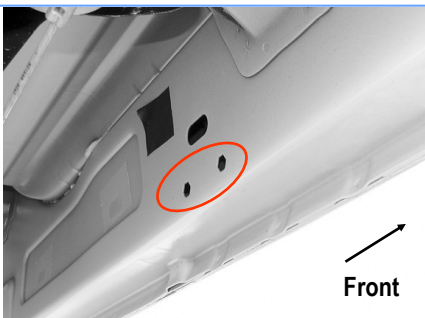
Attach Support Bracket to the Back of Pinch Weld (Some Models May Require to Drill Holes on Pinch Weld)
